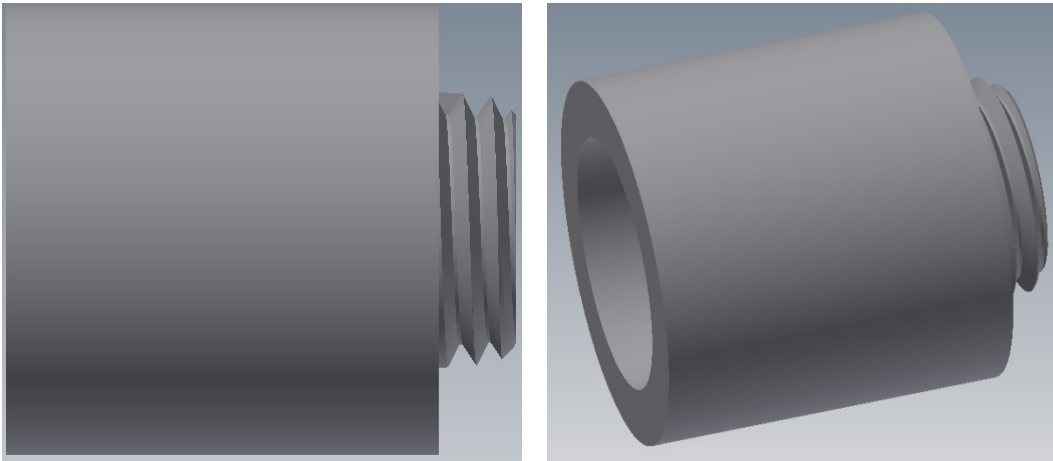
3D model of the inlet adapter. Left – side view. Right – angled view
